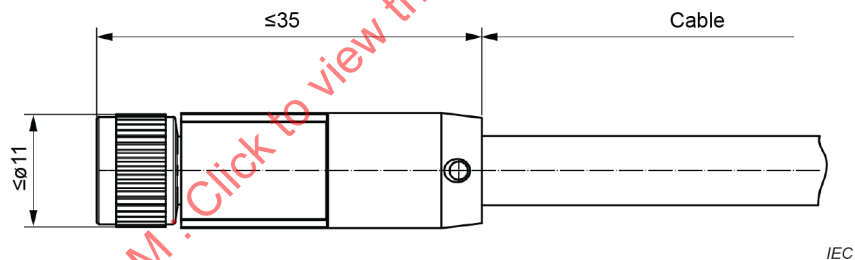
Non-rewirable connector, female contacts, straight version, with locking nut
